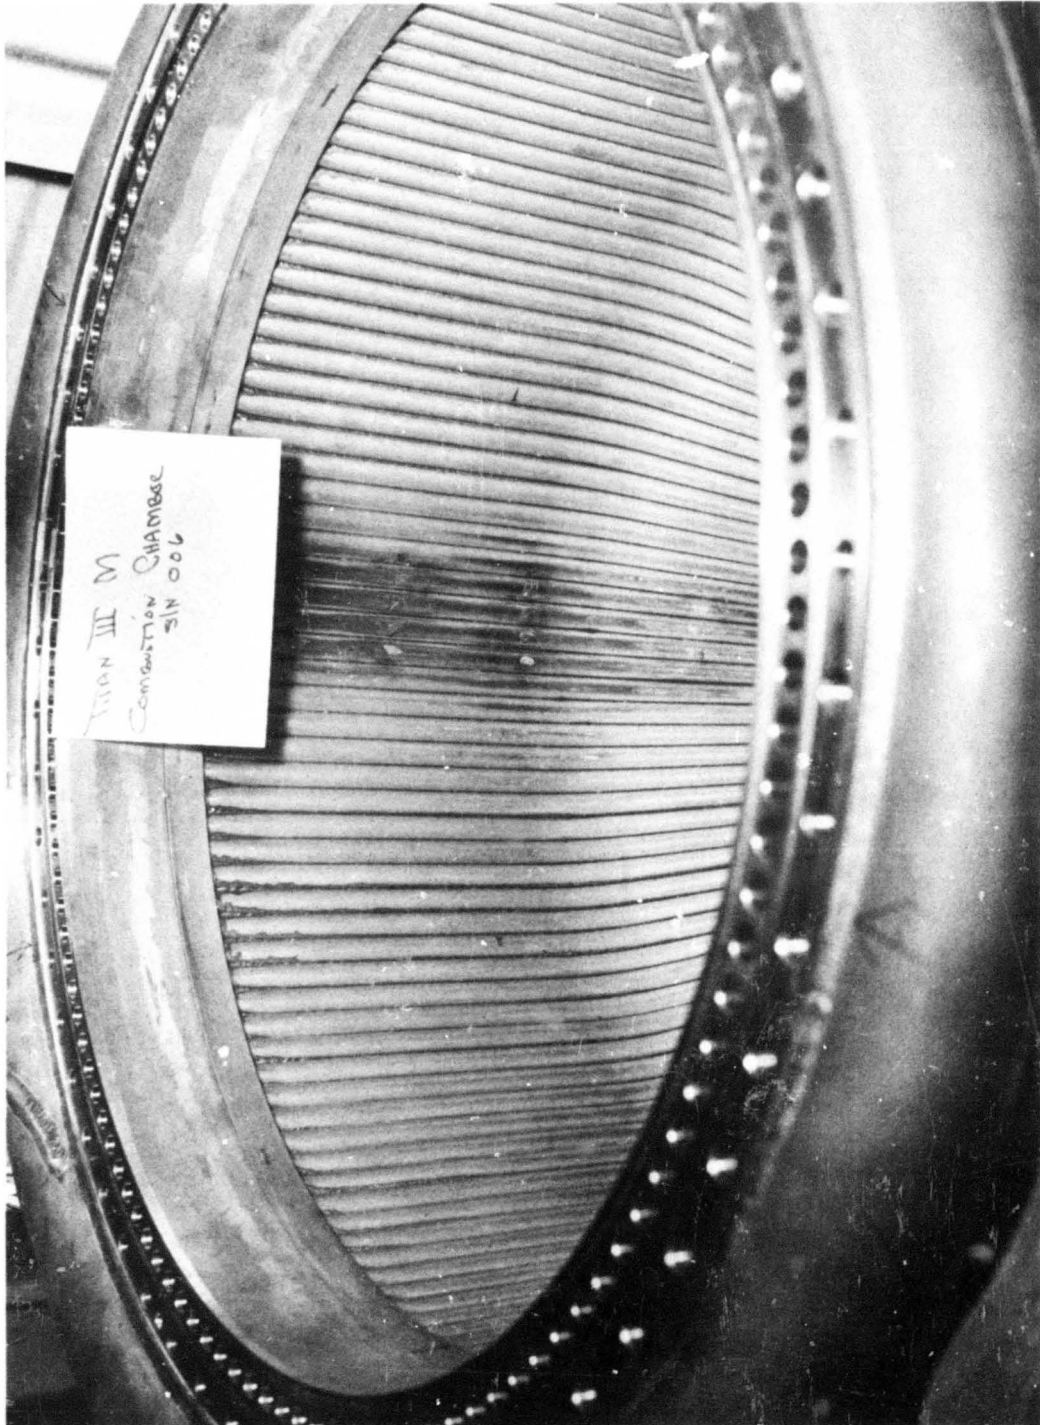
Chamber S/N 006 -- Braze Patch Installation
